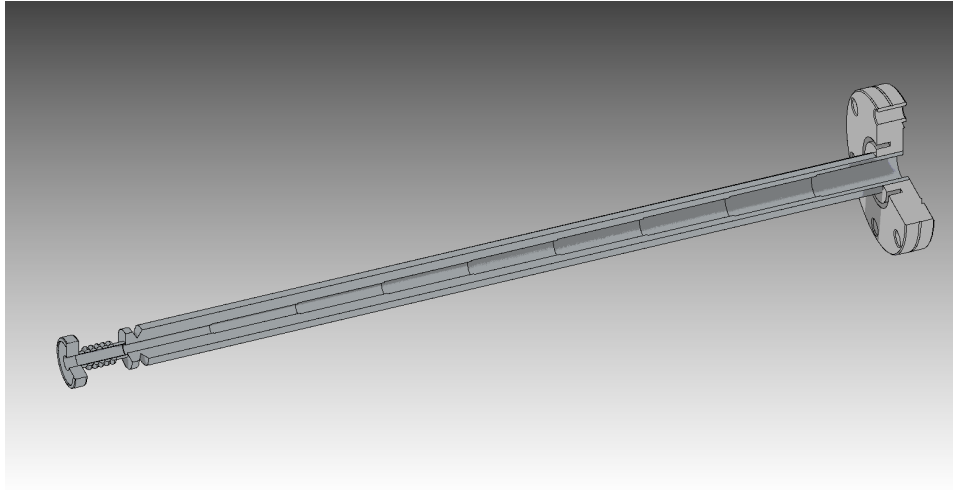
Differential pumping tube. The inner diameter changes from 5 mm to 13 mm in 9 steps. The groove in the back flange (right) allows for mounting of the Zeeman slower tube.
